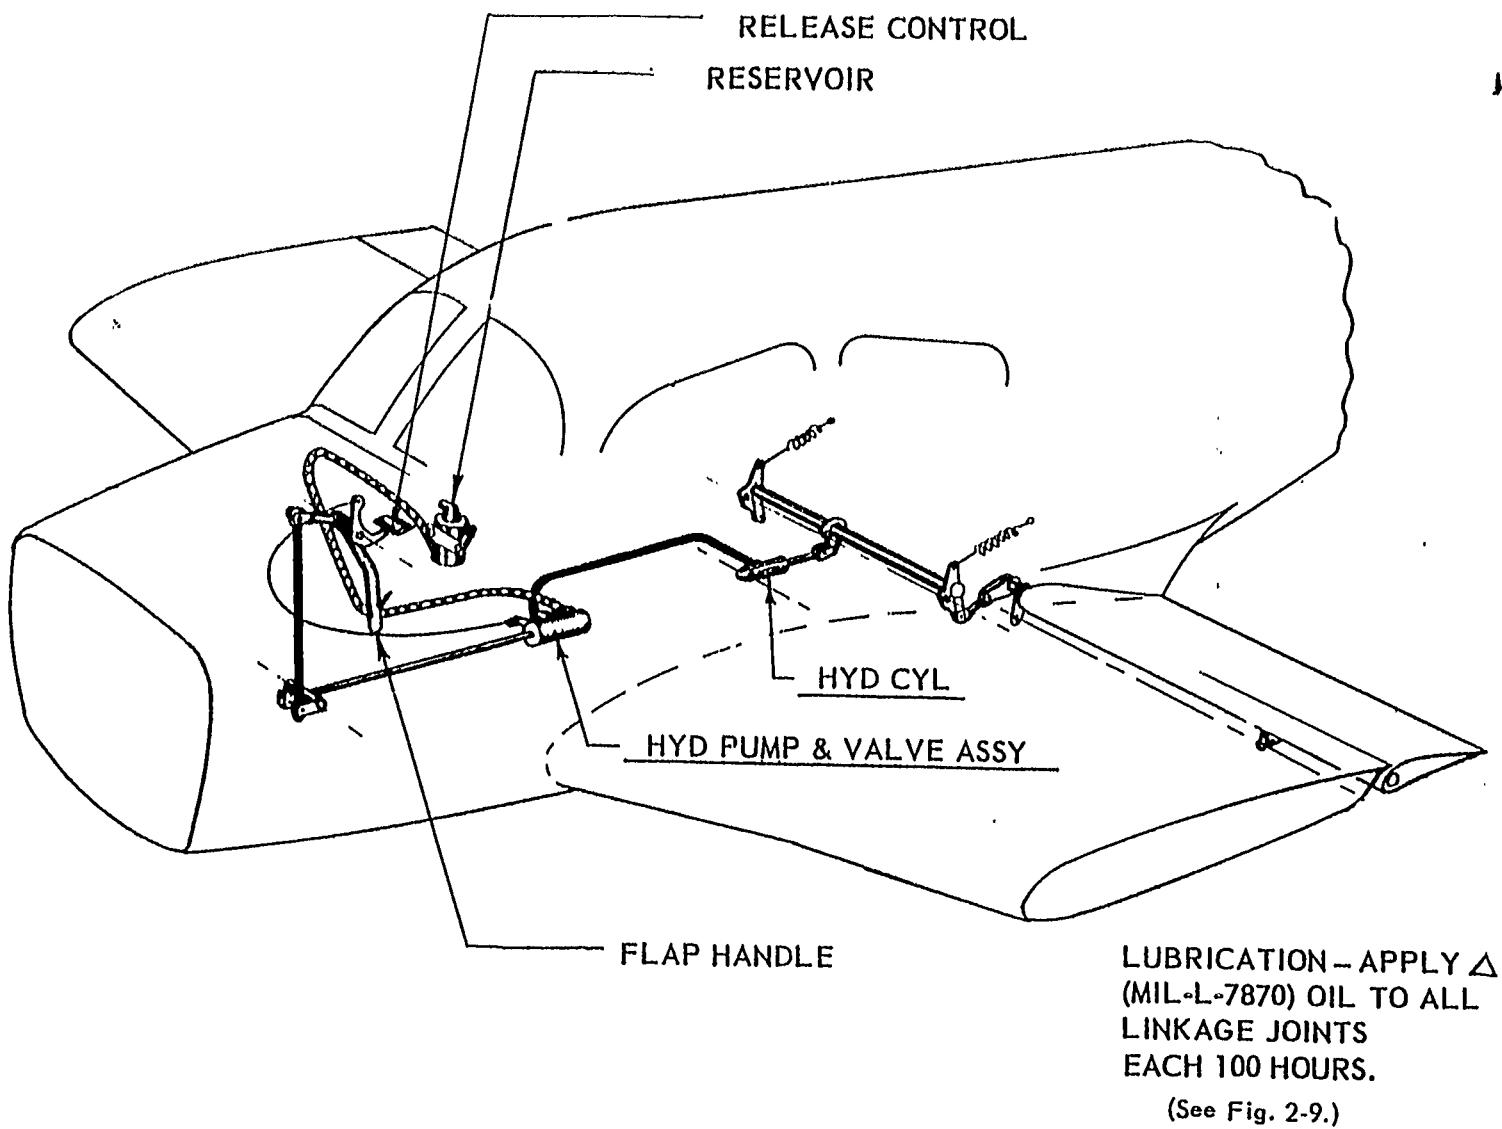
FLAP PUMP AND VALVE ASSEMBLY
